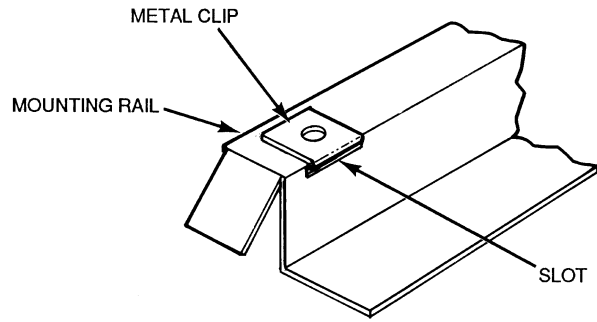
REMOVE METAL CLIP ON GE METAL SLEEVE
